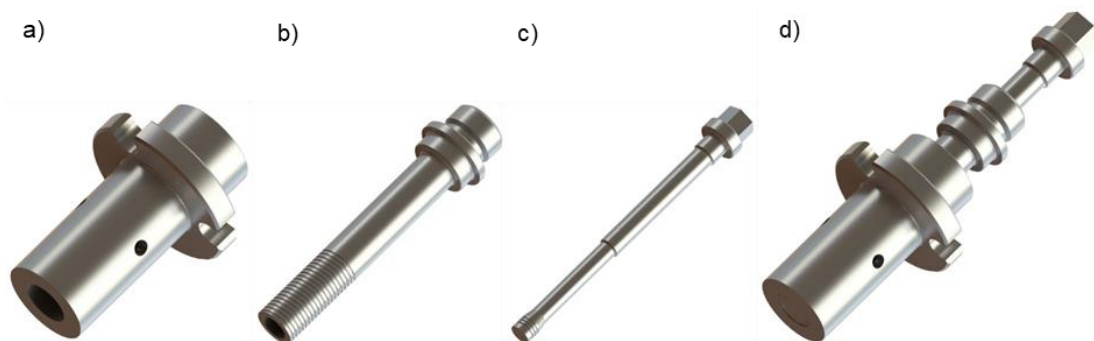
Illustration of the welding tool elements a) clamping ring b) sleeve c) pin and d) attachment configuration of the tool.
